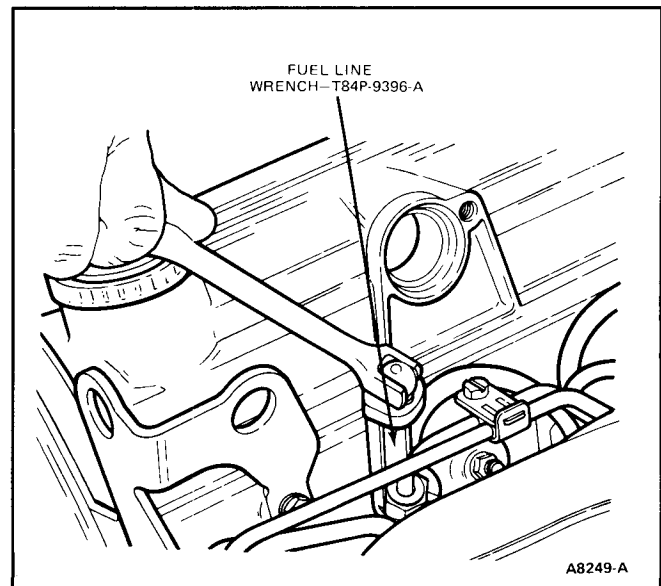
Injection Pump Nozzle High Pressure Line Removal
